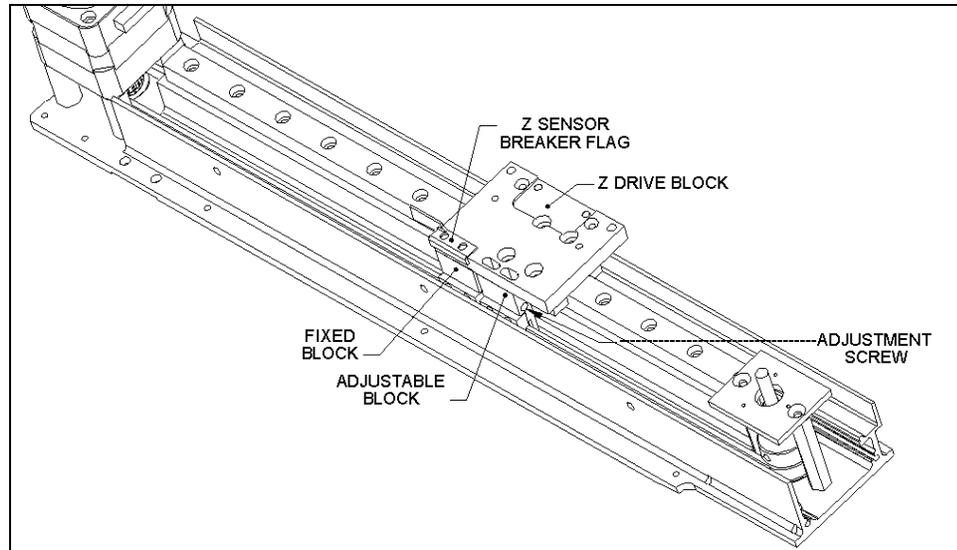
Mounting the Z Sensor Breaker Flag, Z-Drive Block, and the Linear Bearing Block
